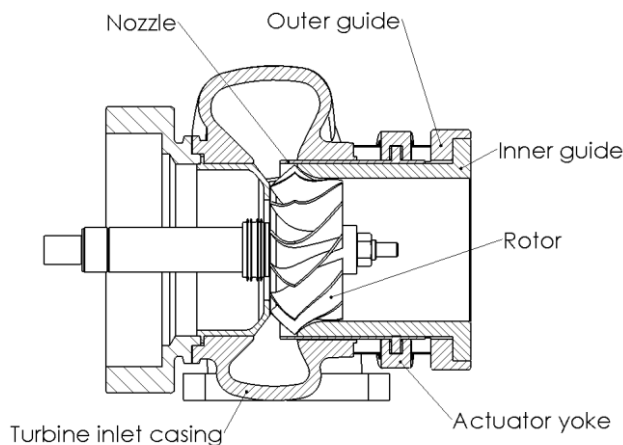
ACT sectional view with MFT rotor 'D'. The thin section nozzle can be seen protruding axially at the inlet to the turbine.
